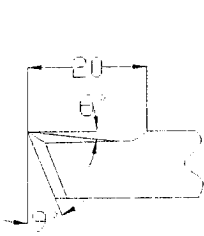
and 4.3 are designs of the turning tool and the threading tool, respectively. For the turning tool, the rake angle was six degrees whilst the clearance angle was nine degrees. Note that as stated earlier the boring tool tip was a standard carbide tip.
